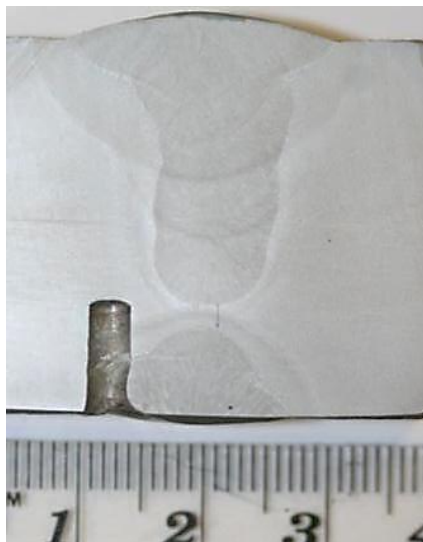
Macrographs of X65 (B) weld 1
